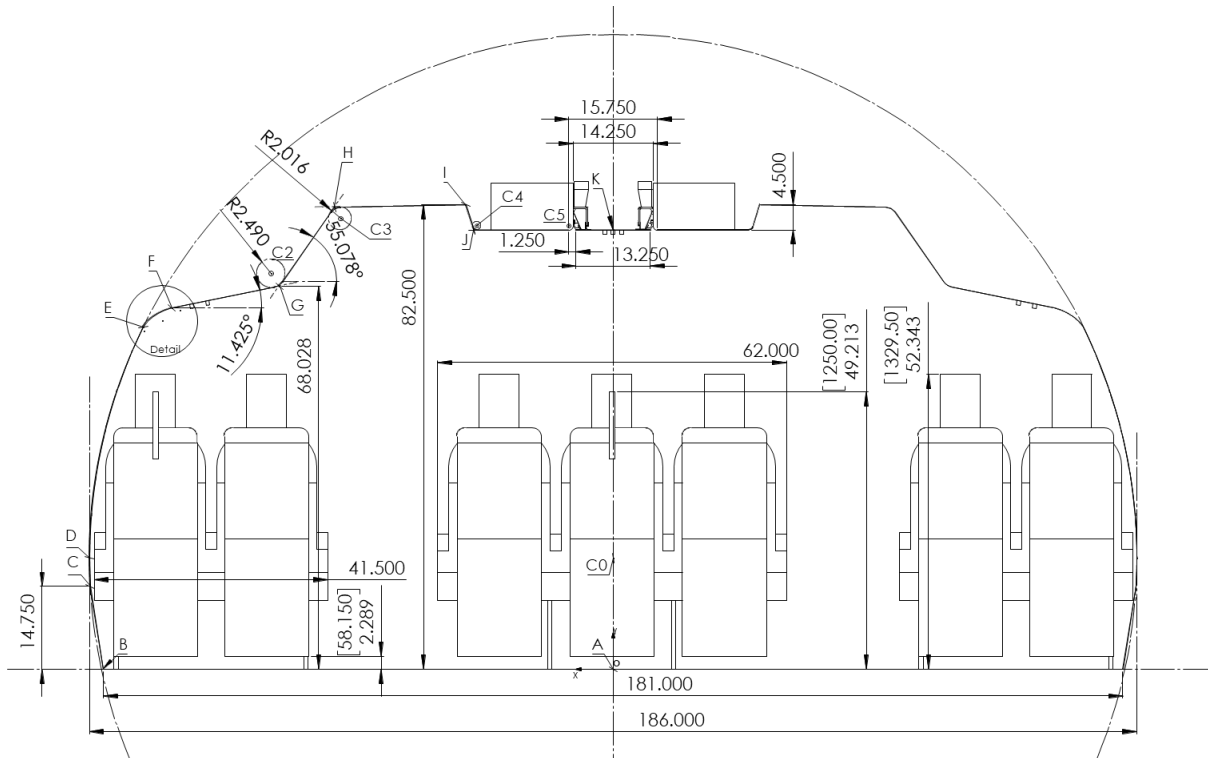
2D Drawing of cabin cross section and dimensions in inches and [millimeters].
